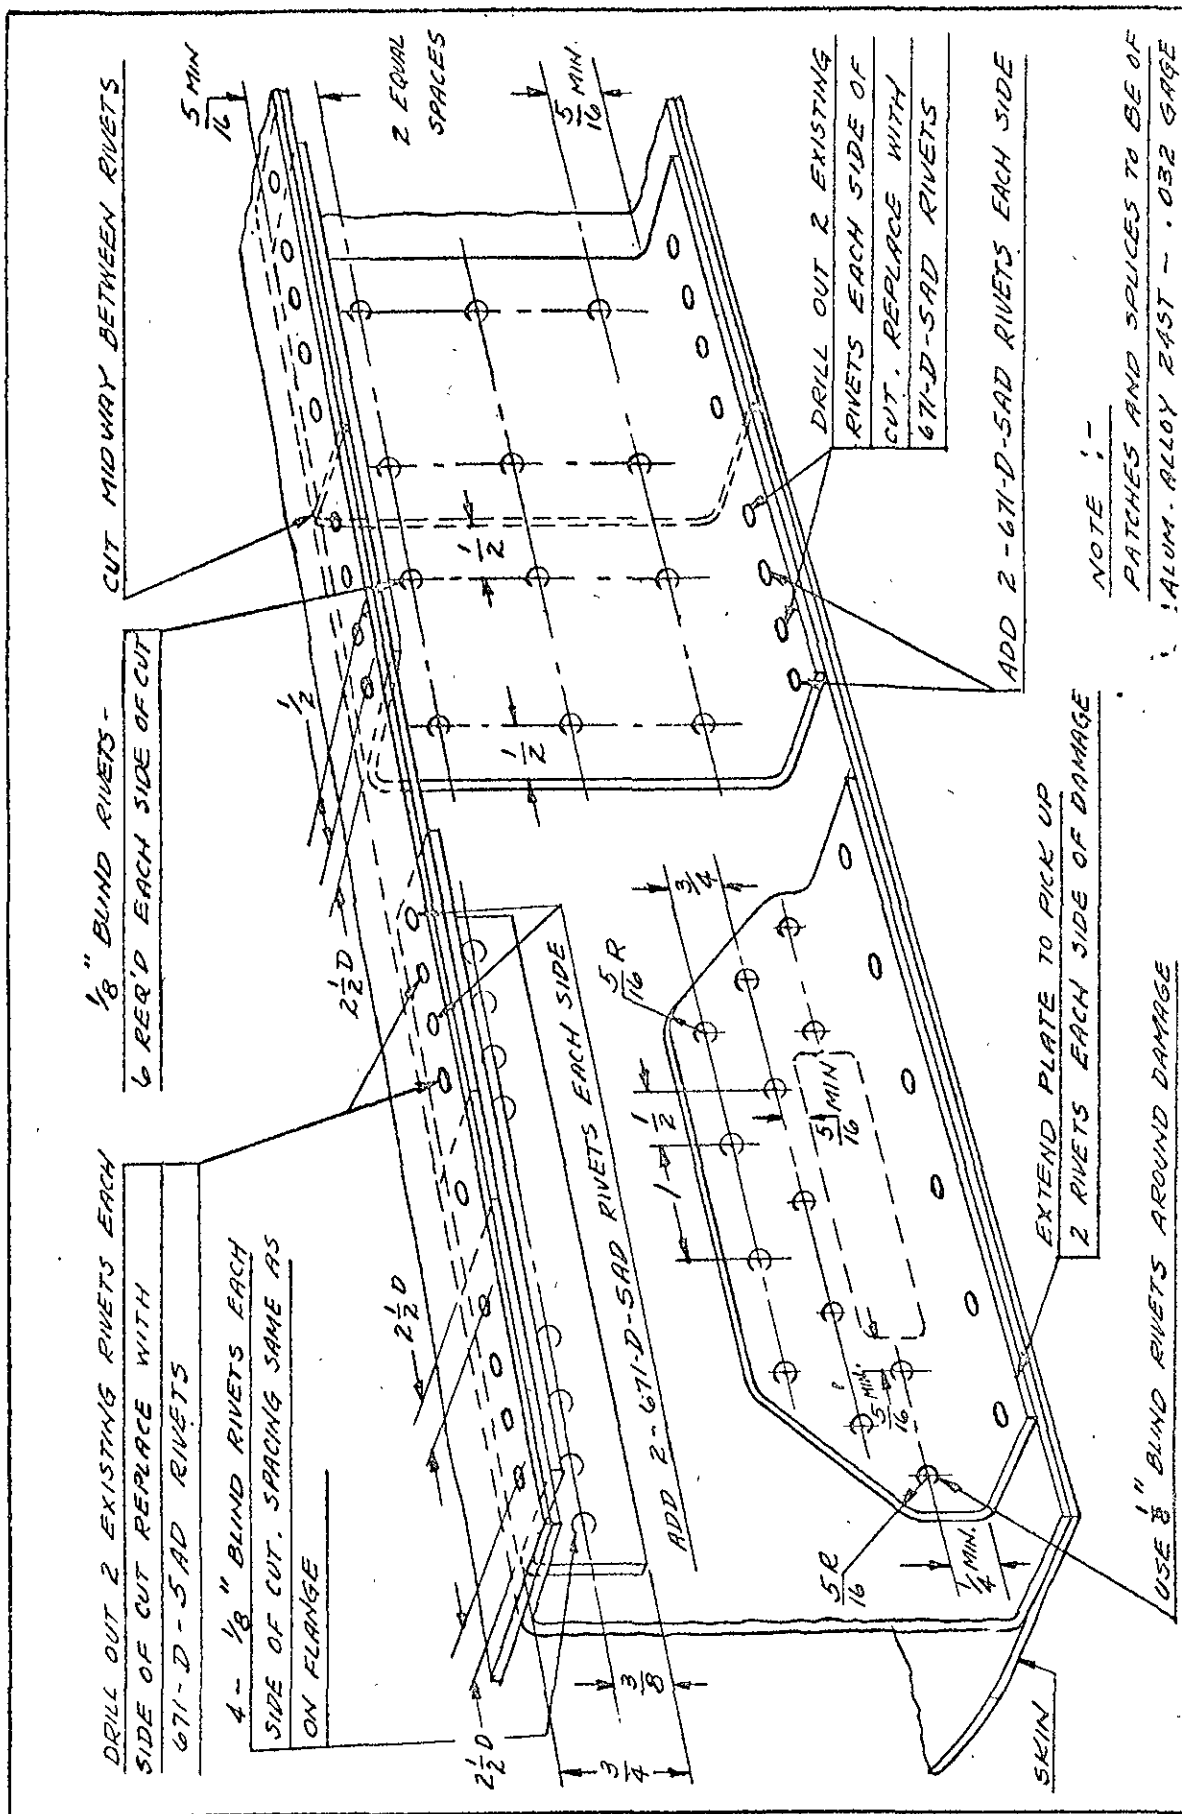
AILERON-BEAM SPLICE & PATCHES
